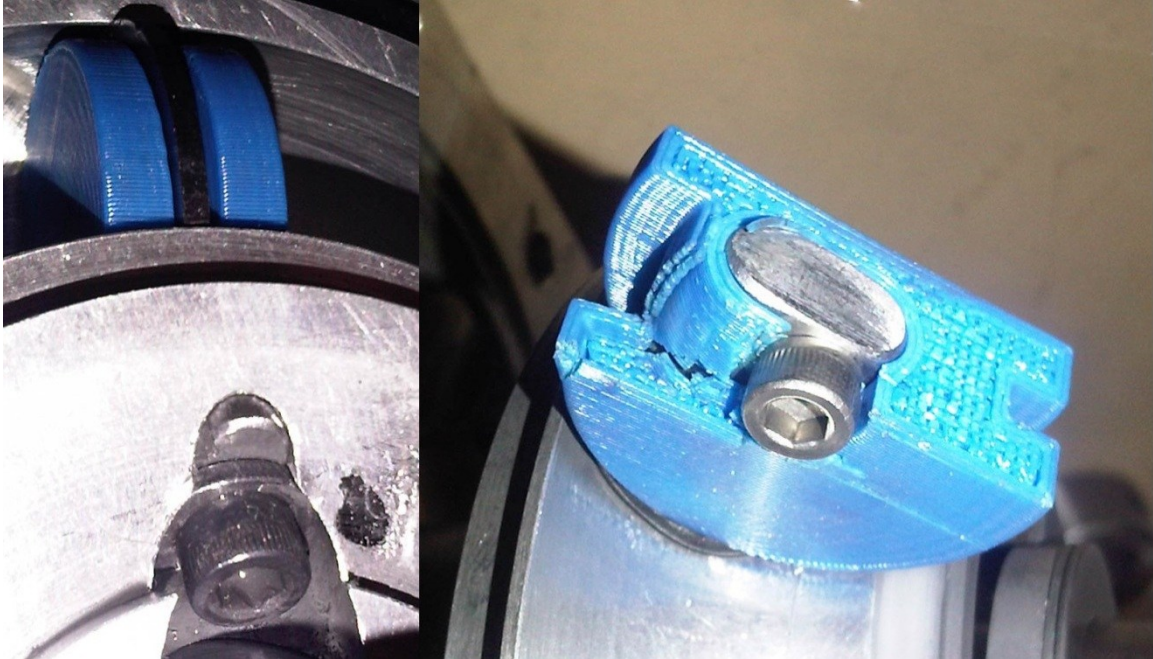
Installed piston with piston paddle and rapid prototyped piston (left), and failed rapid prototyped piston (right).
